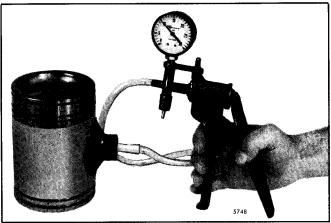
Checking Piston Pin Retainer for Proper Sealing with Tool J 23987-01
